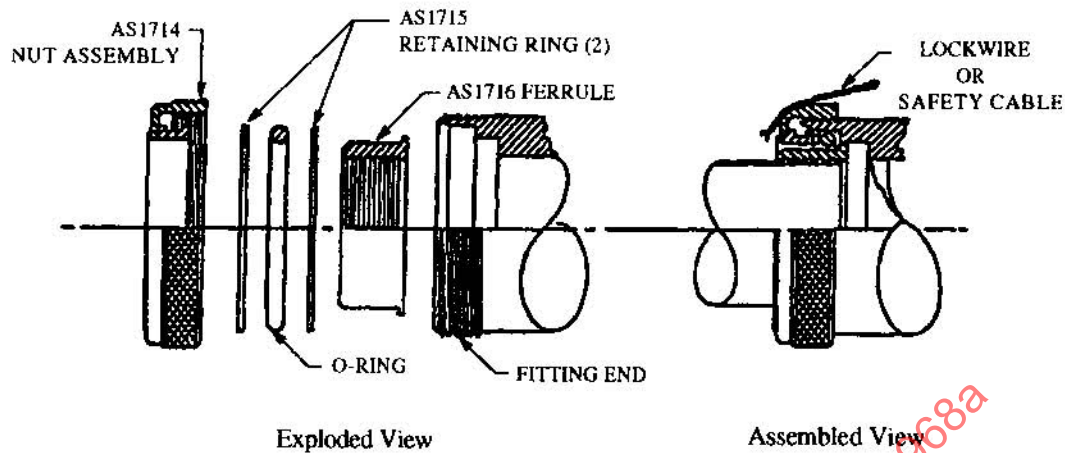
Assembly of Flexible Type Half-Coupling
